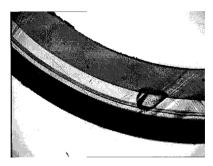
Failure of a multi-layer pipe caused by a particulate inclusion, light-microscopic image of a fractured surface
